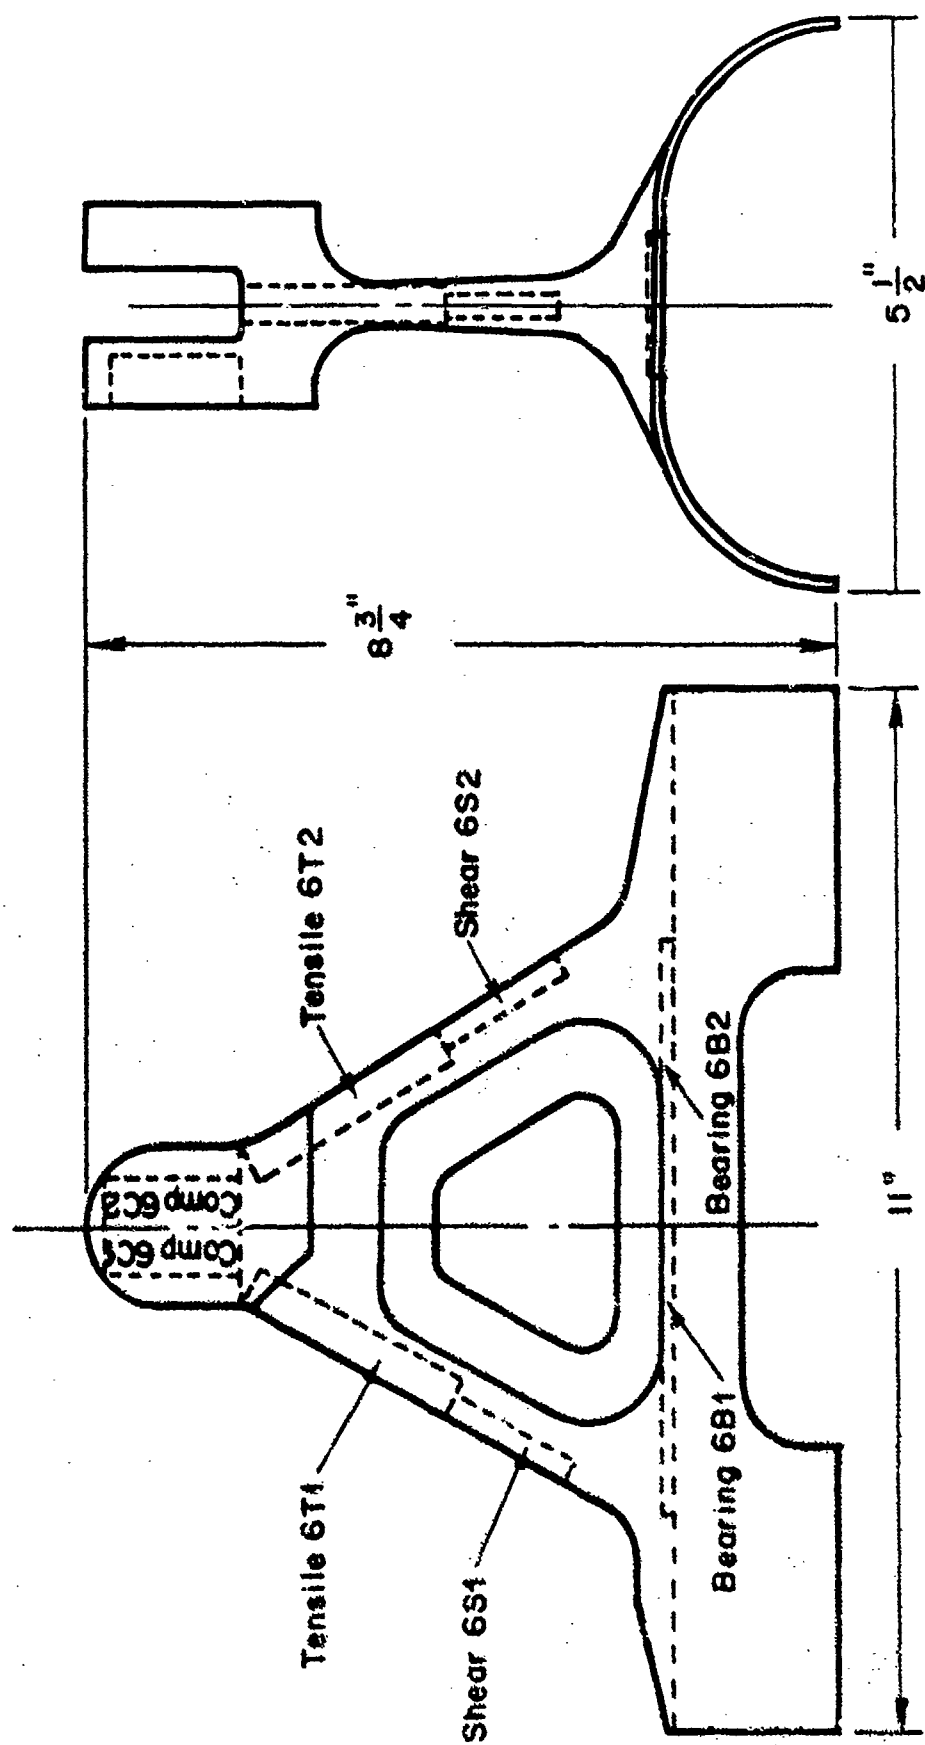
Test specimen location for 15-5PH (H935) A-bracket casting.
